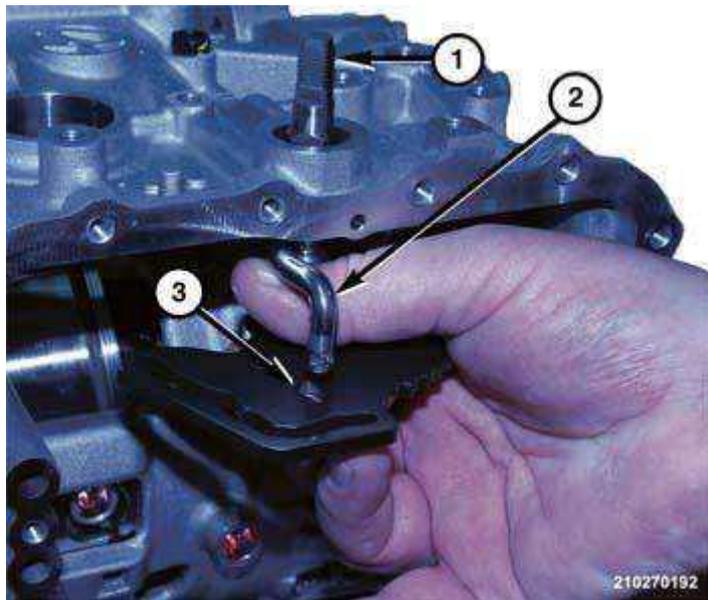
Manual Shaft, Park Rod & Key Hole Slot
